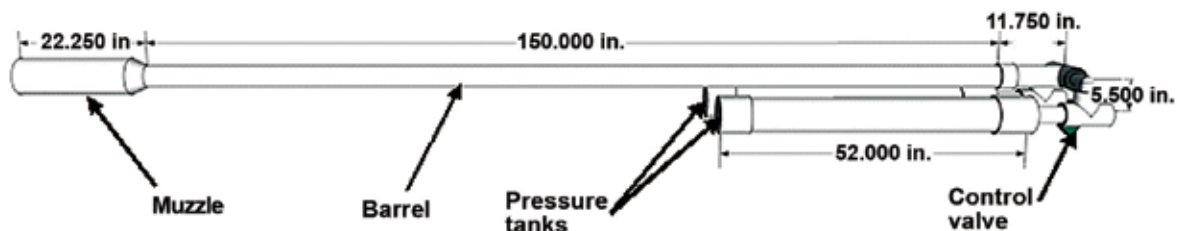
Details of the dimensions of the FPL debris launcher.
